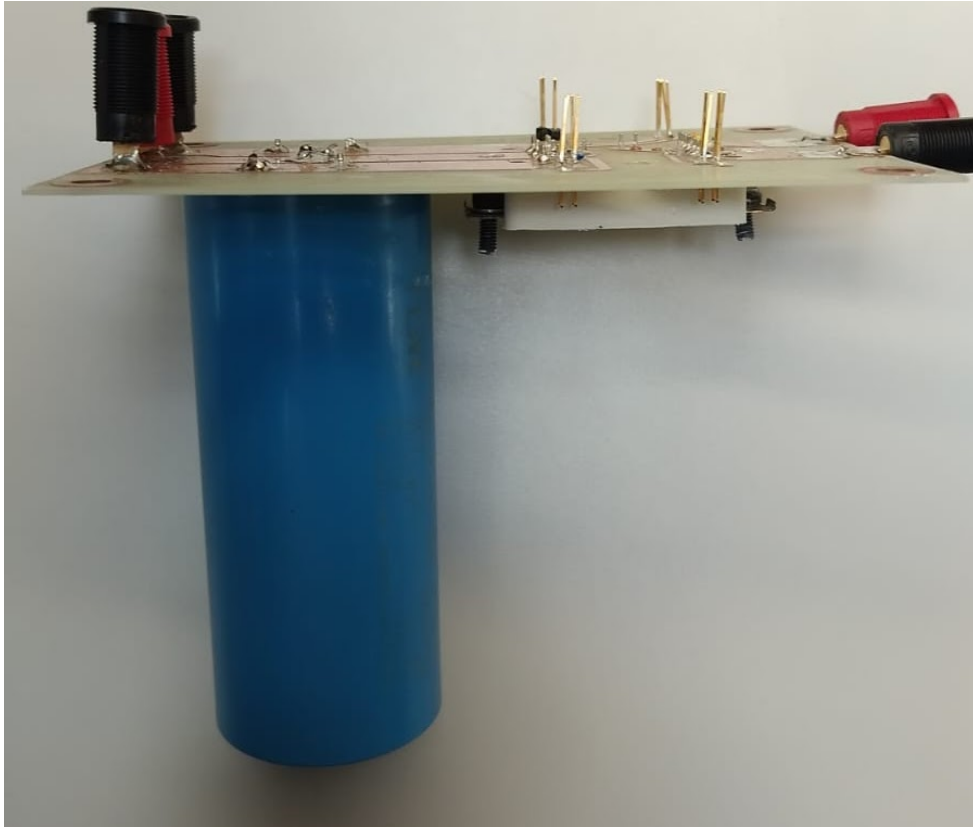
MOSFET, bulk capacitor, and Inverter PCB soldered
